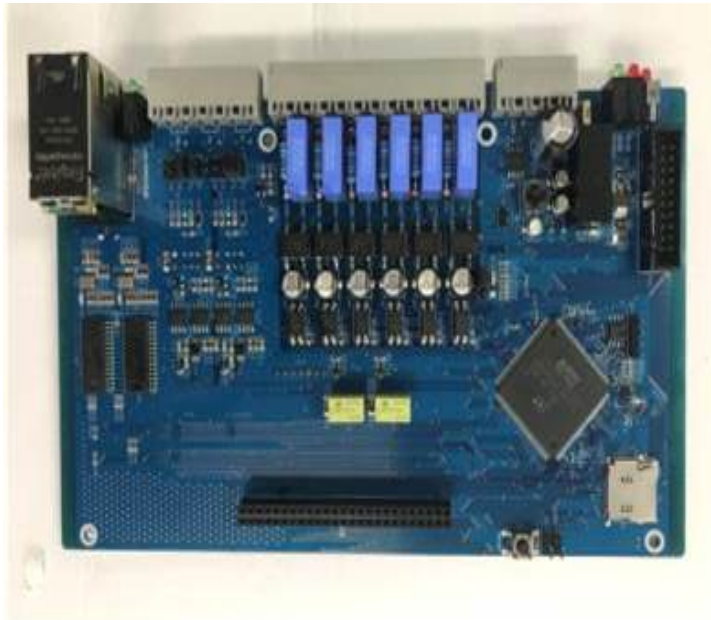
PCB photo on the left side of the SYSTEM(a)
